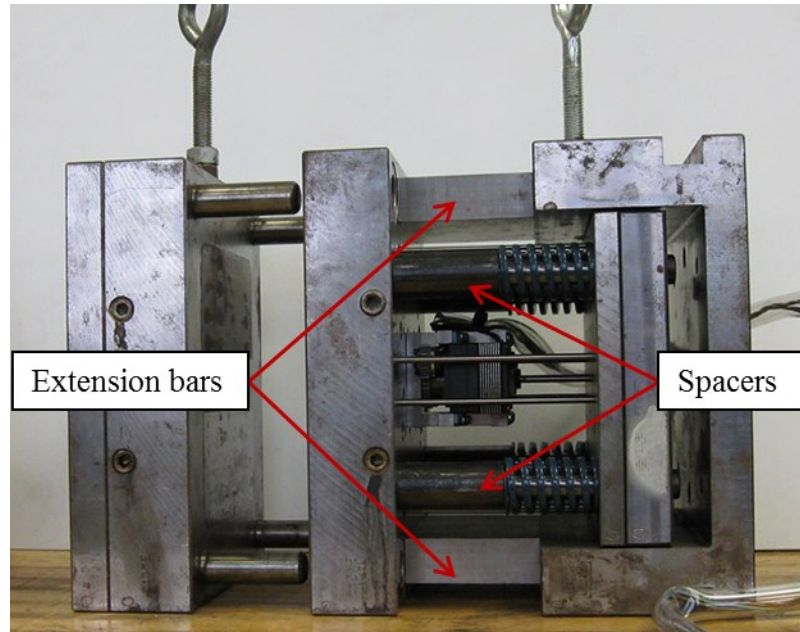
Compact Melt Modulation Mold Base with Control Valve Driving Mechanism
